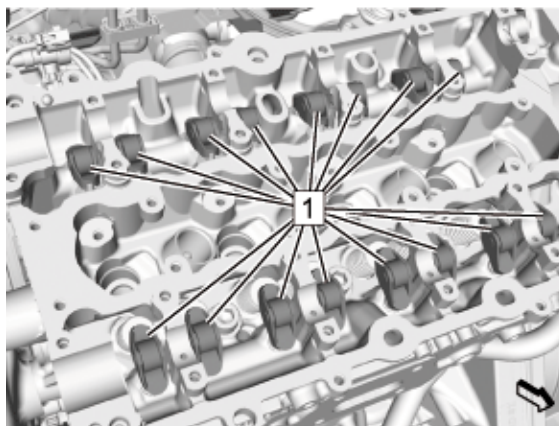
Hydraulic Valve Lash Adjuster Arms
